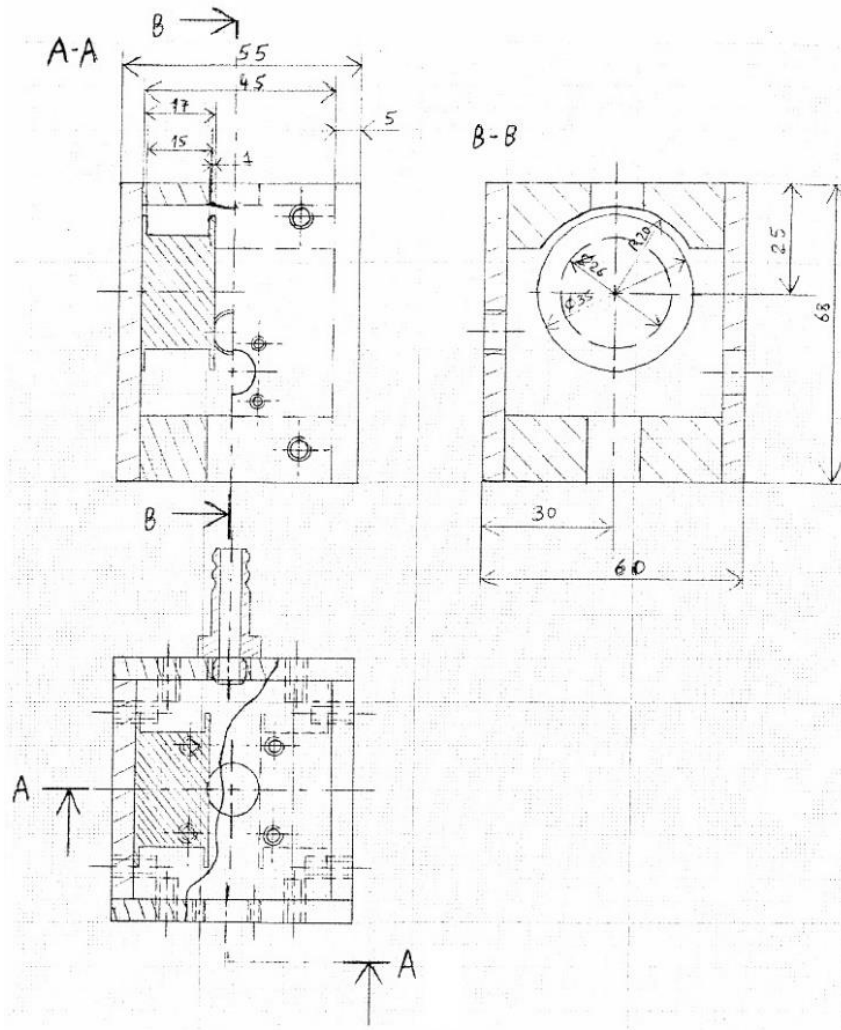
Technical drawing of the developed box containing the Helmholtz Coil in multiview orthographic projection.
